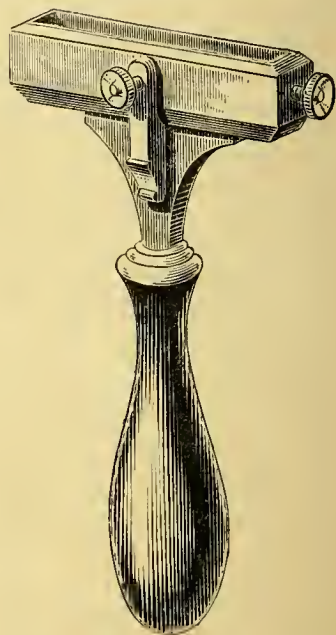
TYPE-HOLDER USED BY FINISHERS
